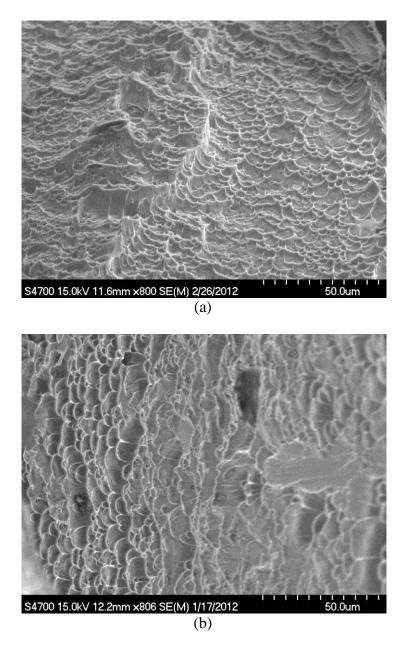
Fractographs of miniature tensile test specimen showing dimple fracture appearance that confirm ductile failure
